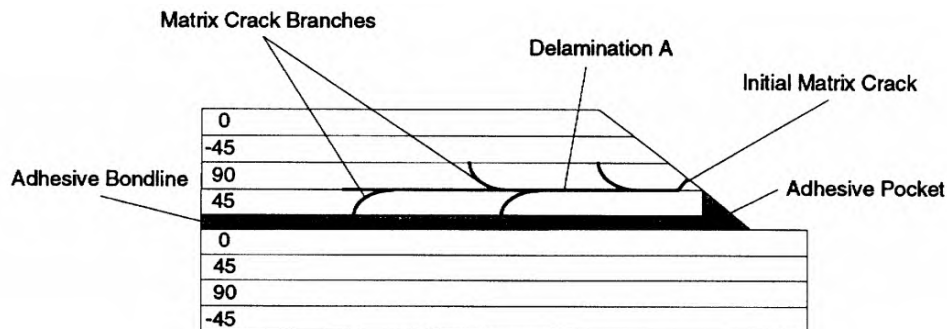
Skin-stringer bondline specimen: Typical damage patterns in corners 1 and 4 [44]
